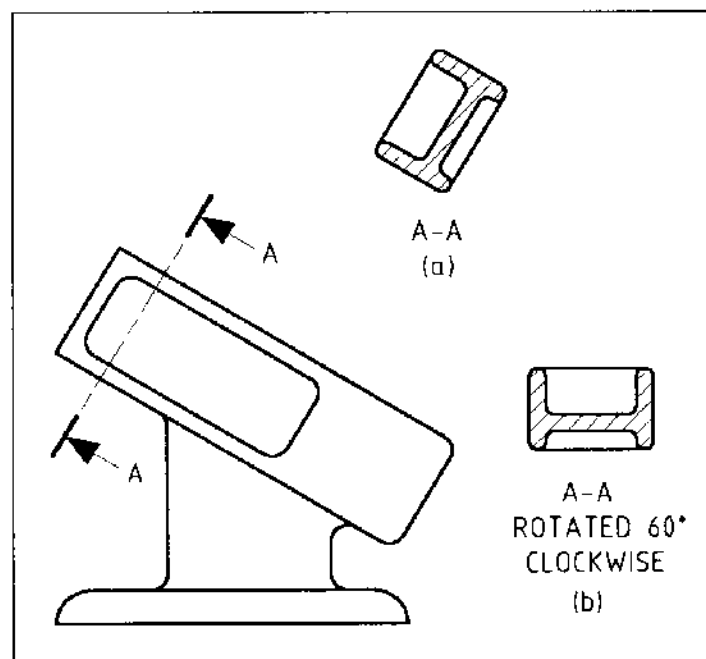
PLACEMENT OF SECTIONAL VIEWS
